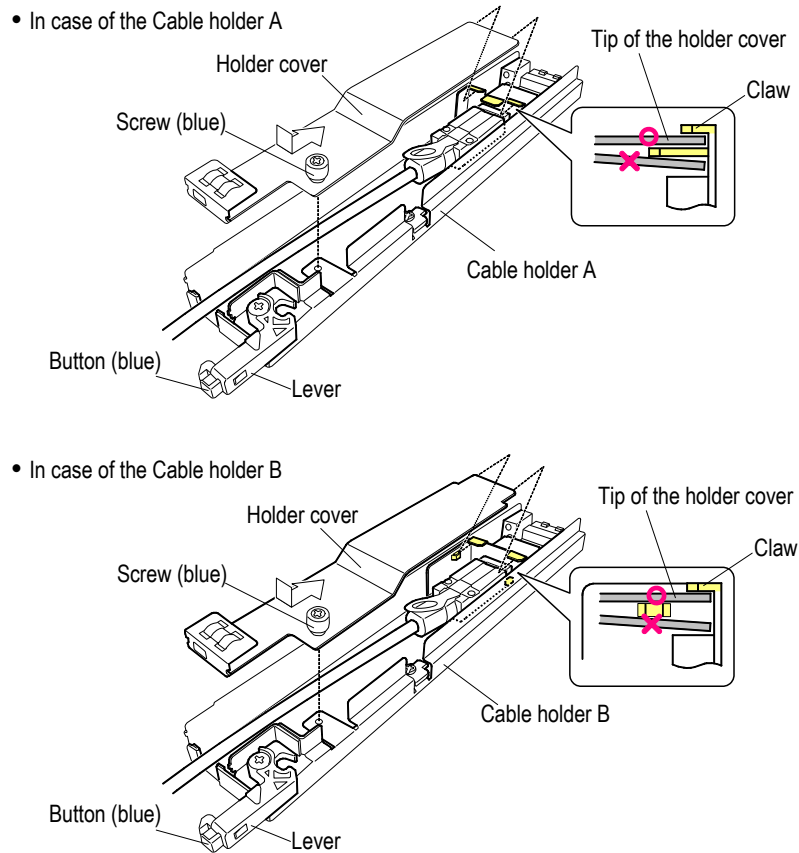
Attaching the Cable Holder and the Holder Cover
